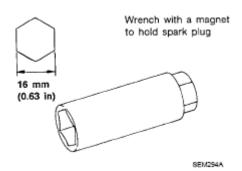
Identifying Park Plug Tool Courtesy of NISSAN MOTOR CO., U.S.A.
